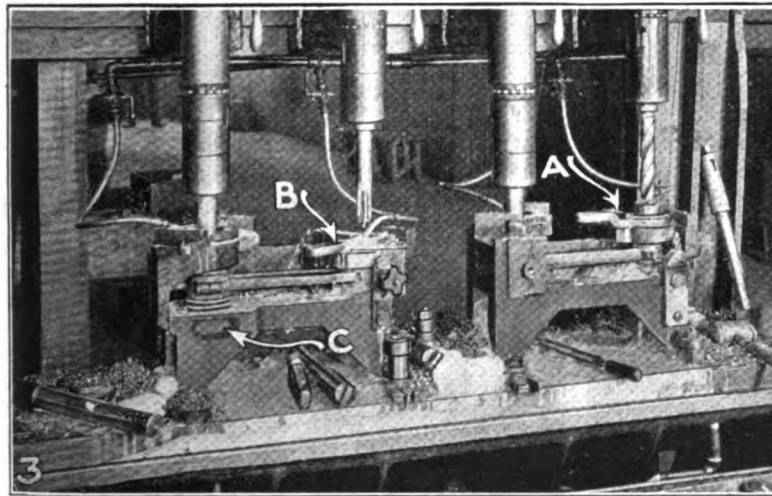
DRILLING AND REAMING BOLT HOLES. FIG. 4. FACING THE BOLT SEATS
